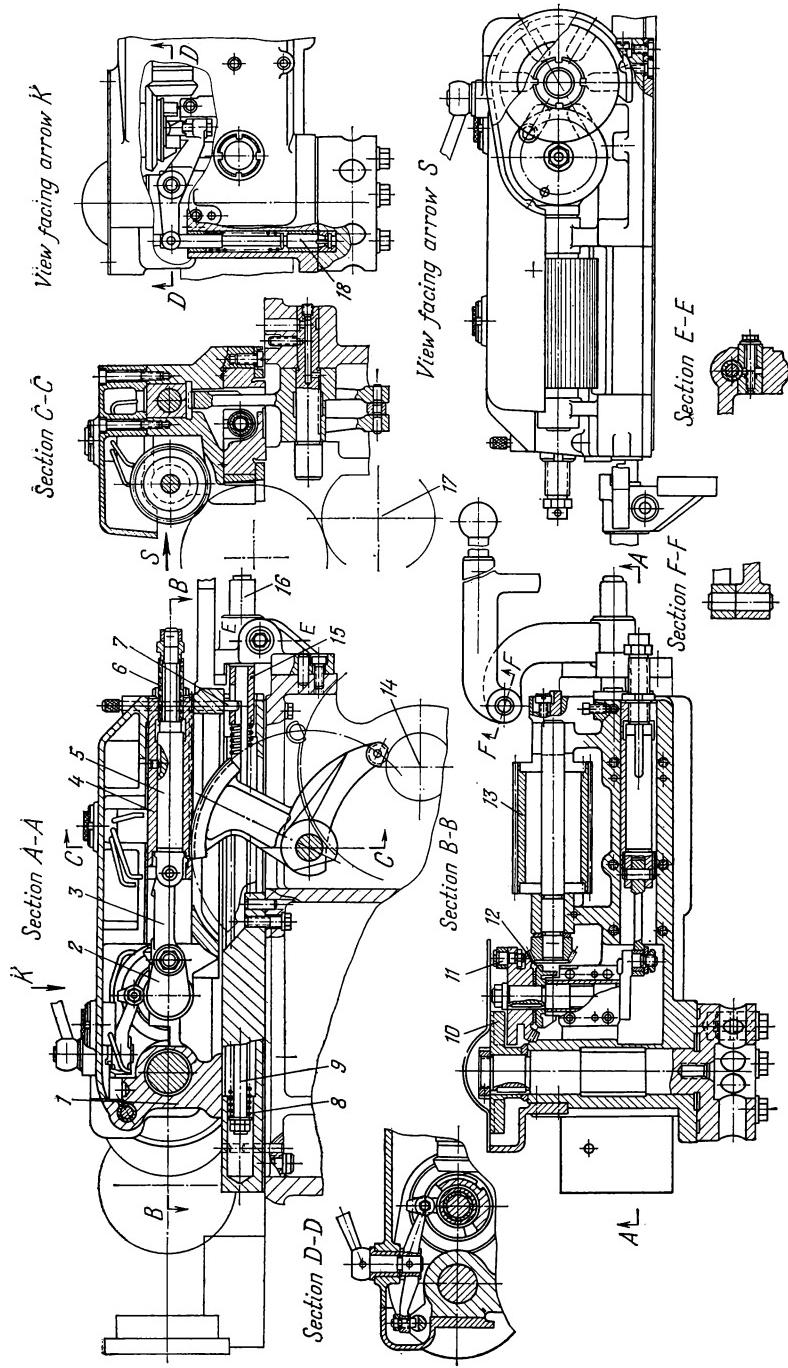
Turret slide of the model 1E136 automatic screw machine:
